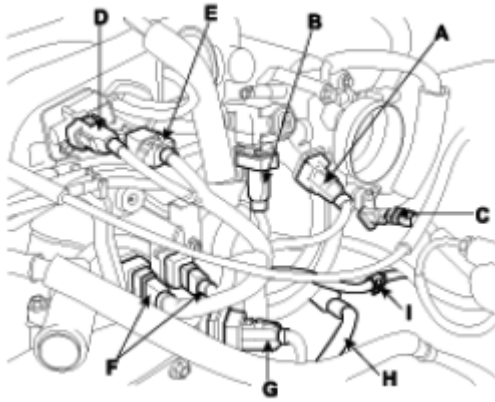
Identifying TPS (Throttle Position Sensor), ISA (Idle Speed Actuator) And PCSV (Purge Control Solenoid Valve) Connector
